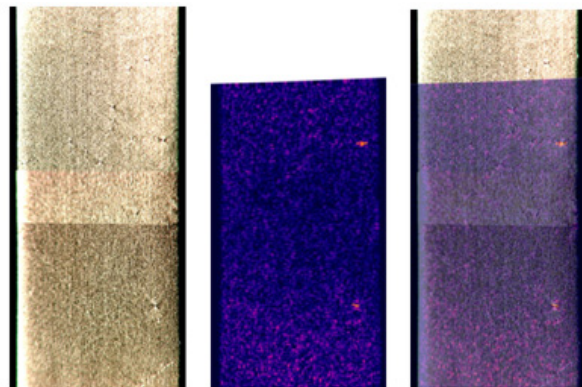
Thermographic detection of small fatigue cracks by lockin-thermography under mechanical loading.
